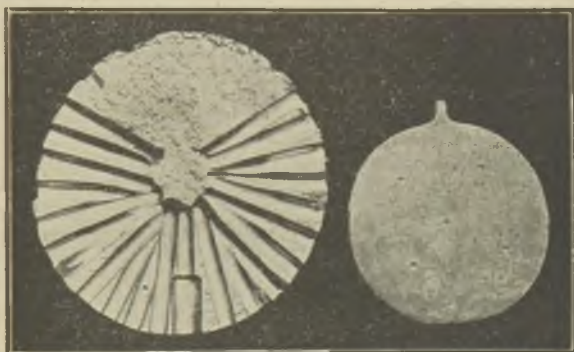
FIG. D.—PERFECTLY SOUND CASTING Poured INTO GANISTER MOULD.
